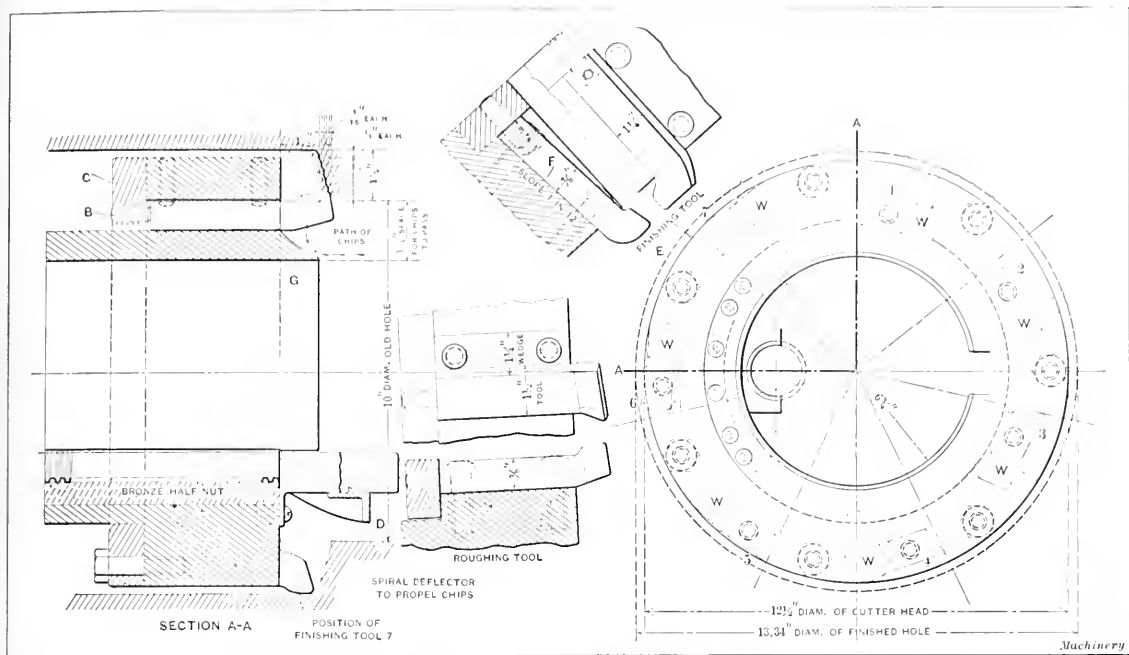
Seven-tool Cutter-head used on Boring Machine
